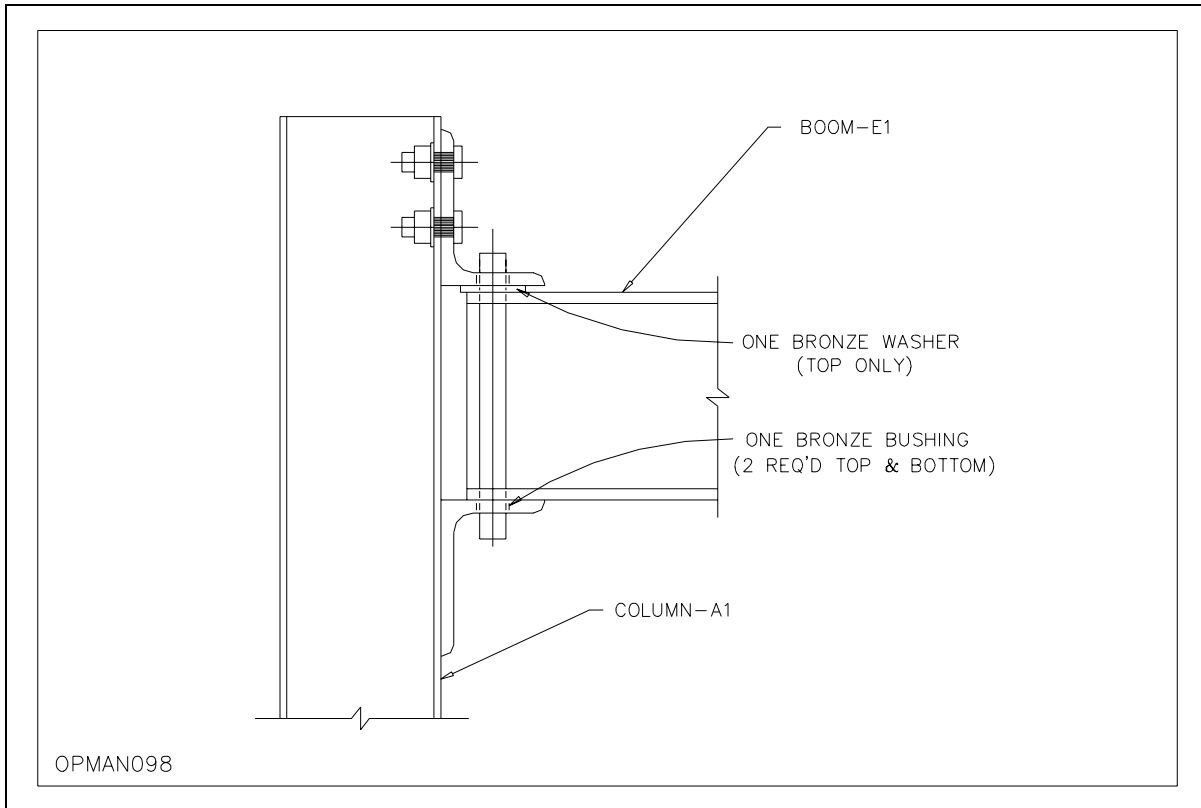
29: Jib Boom: Bronze Bushing and Washer Locations
